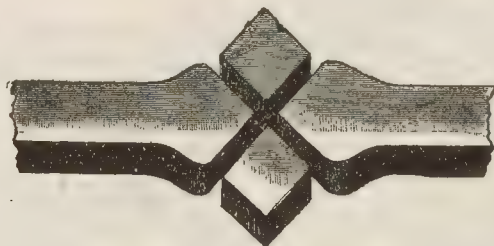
,998.—Glut Weld. A weld in which the ends of the two parts are tapered down, and the angles filled with wedges of iron, the whole being welded together while checking the length with a trammel, excess material being subsequently cut away. This type of weld is generally used in repair work where it is necessary to maintain unchanged the length of the broken part.
